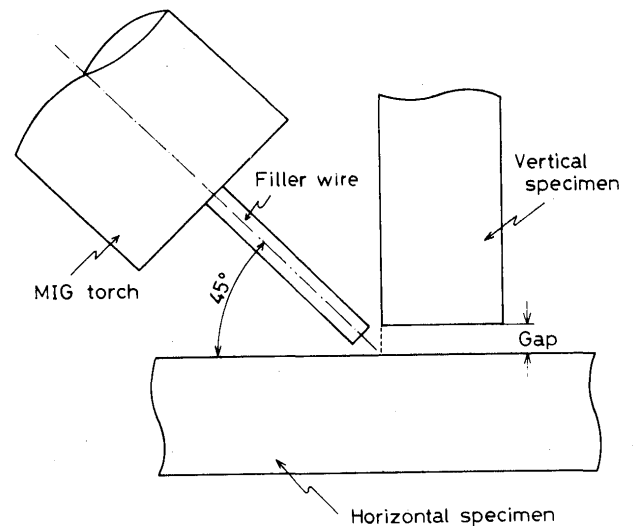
Joint configuration and arrangement of specimen and welding torch in the VDR cracking test
